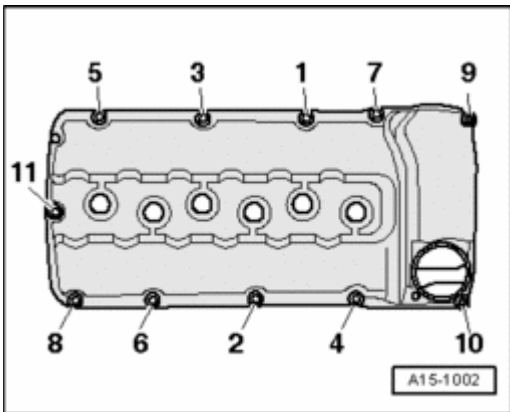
Unscrewing Cylinder Head Cover Bolts In Sequence
